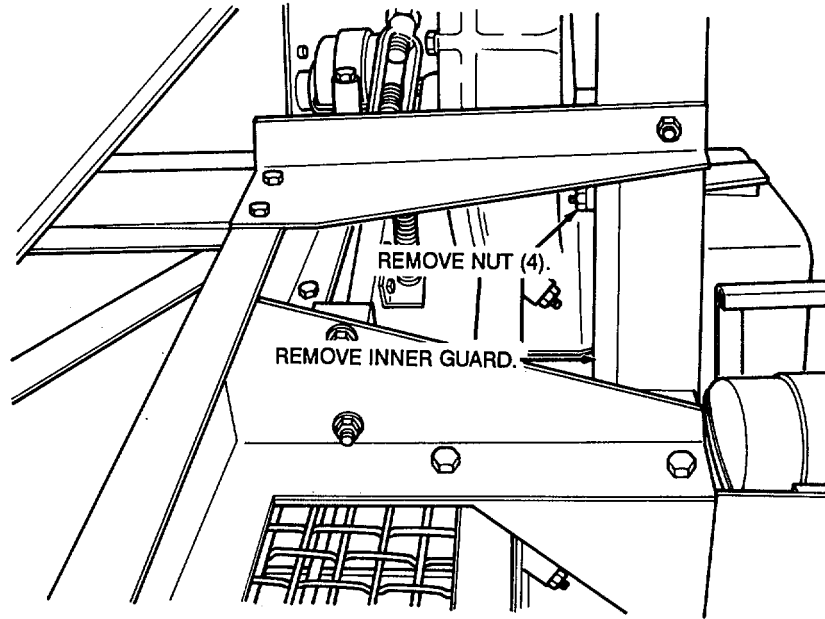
Main (feed) conveyor drive belt guard, removal and installation
